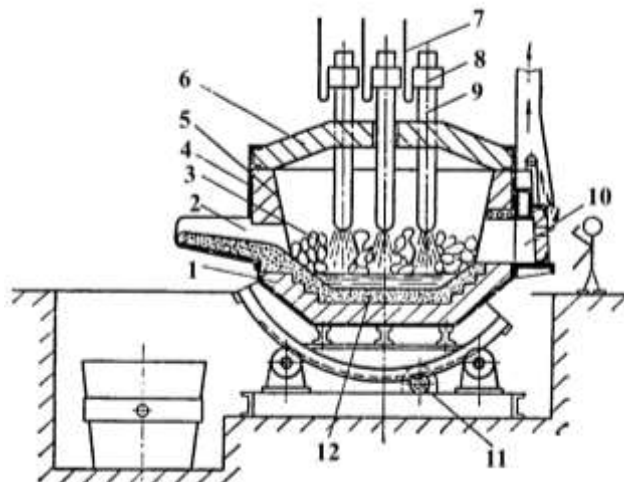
Direct-arc furnace: 1 – fire-proof bricks, 2 – taphole; 3 – charge; 4 – steel shell; 5 – lining; 6 – roof; 7 – flexible cable; 8 – clamp; 9 – electrode; 10 – window; 11 – tilting mechanism; 12 – bottom
